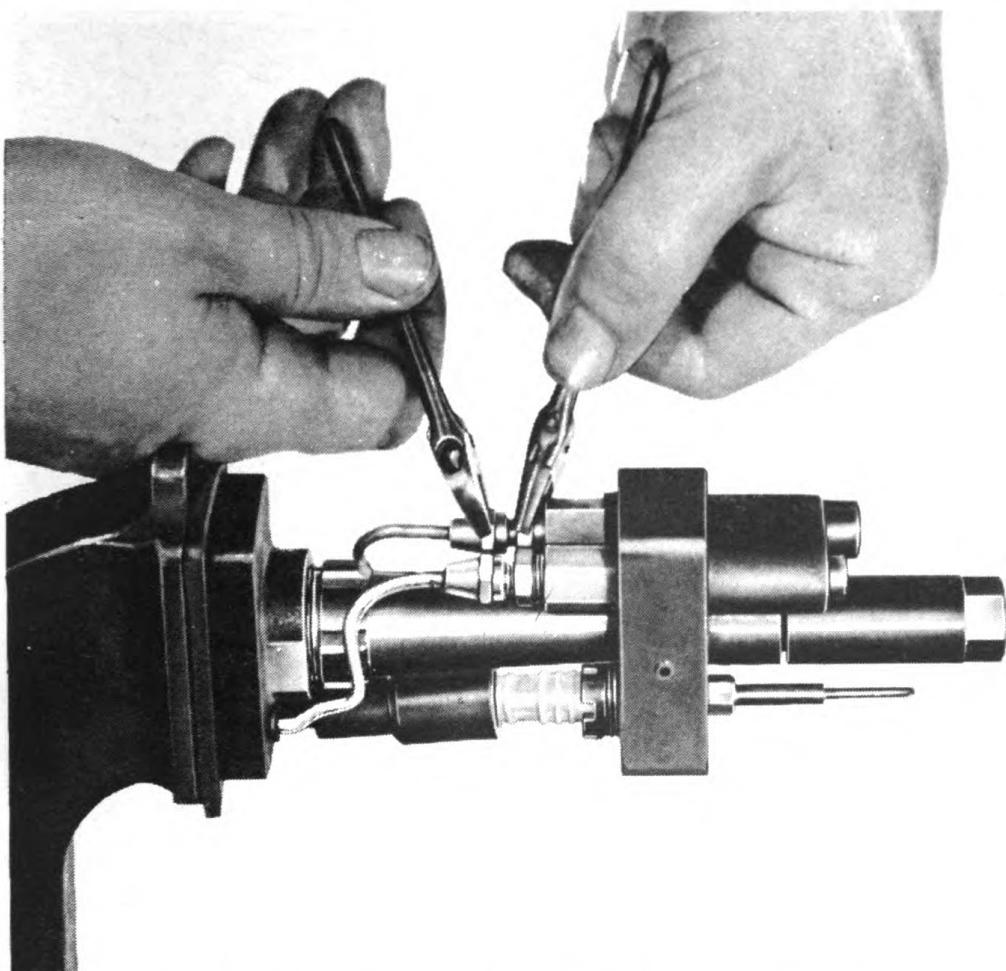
Disconnecting tube nuts on nozzle assembly.
